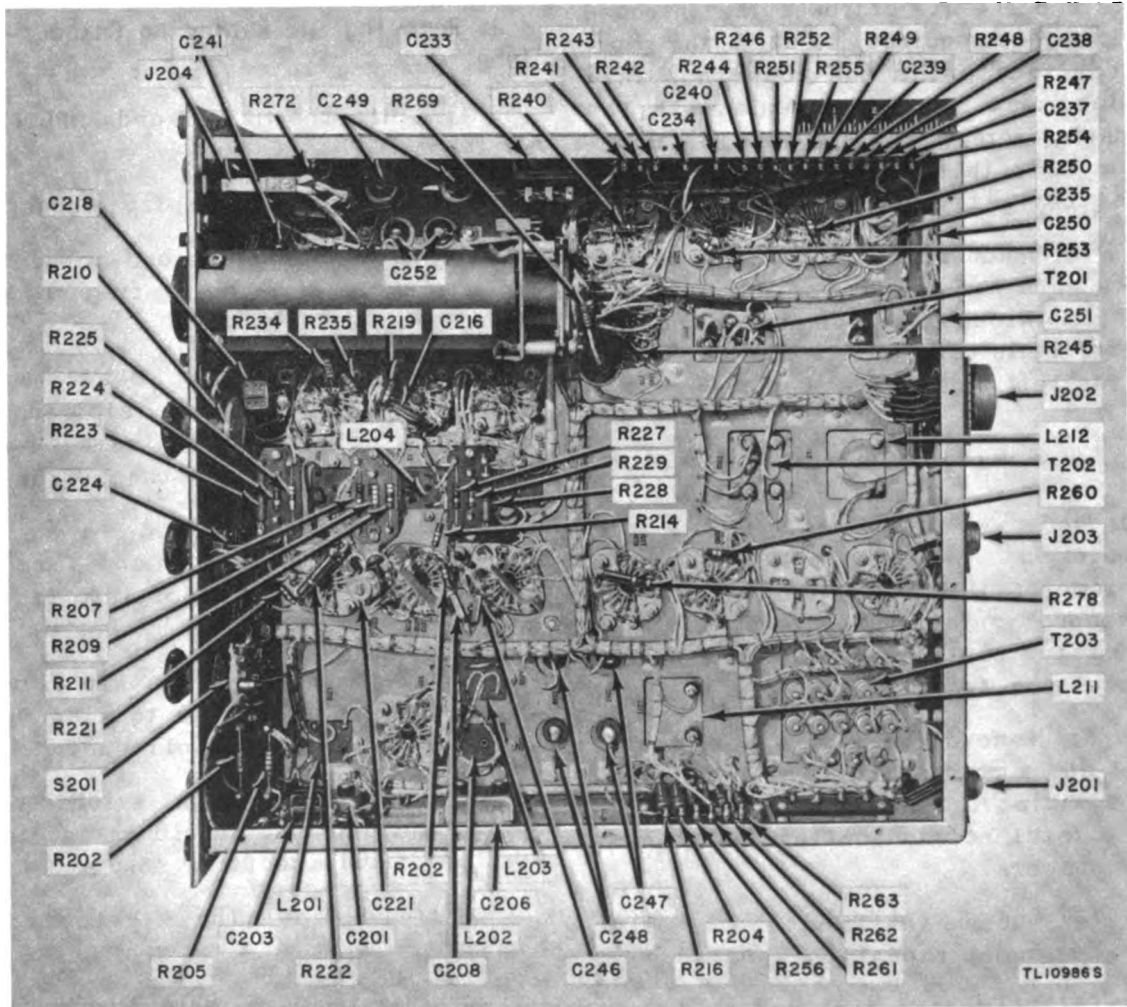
Power indicator section of Radio Receiver Assembly R-128/CRD-3, bottom view showing parts location.
